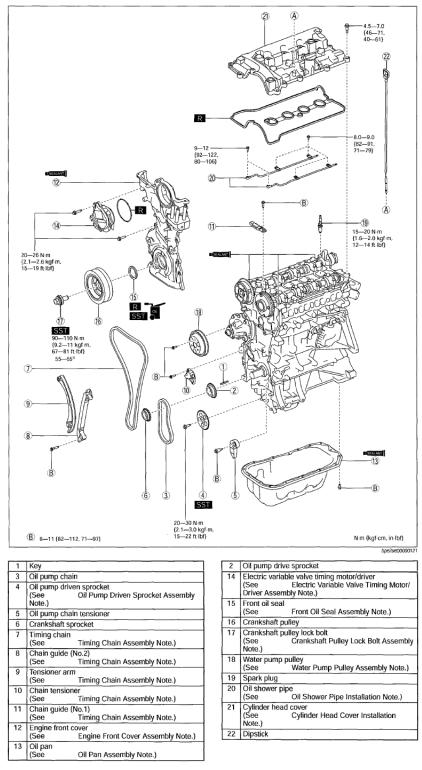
Assembling Order Of Engine Components With Torque Specifications
